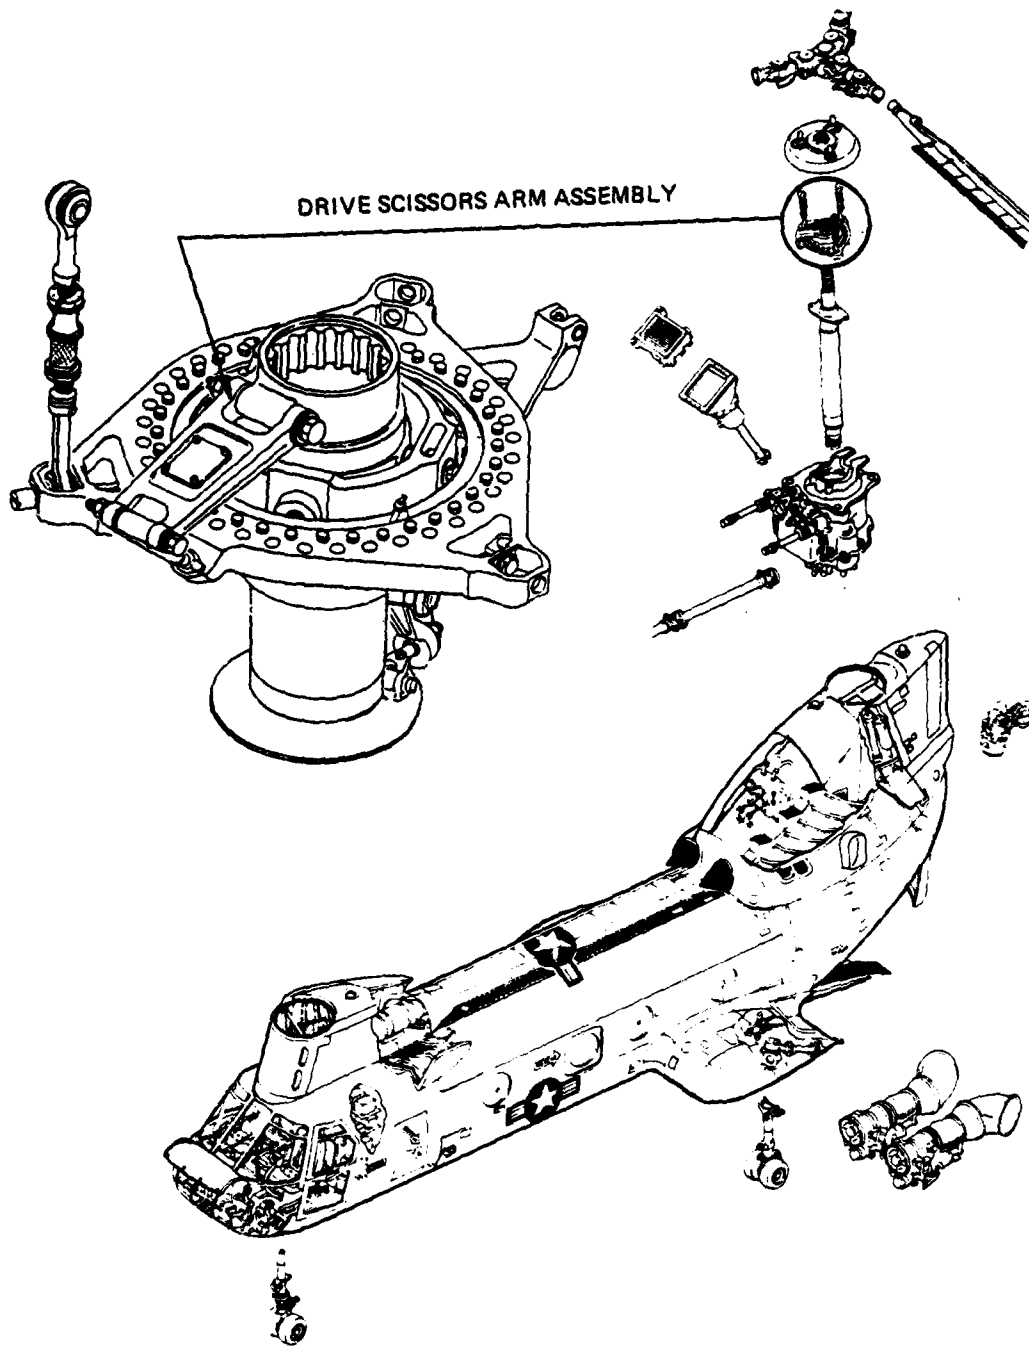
Location of Drive Scissors Arm Assembly With Respect to Helicopter Rotor Control System
